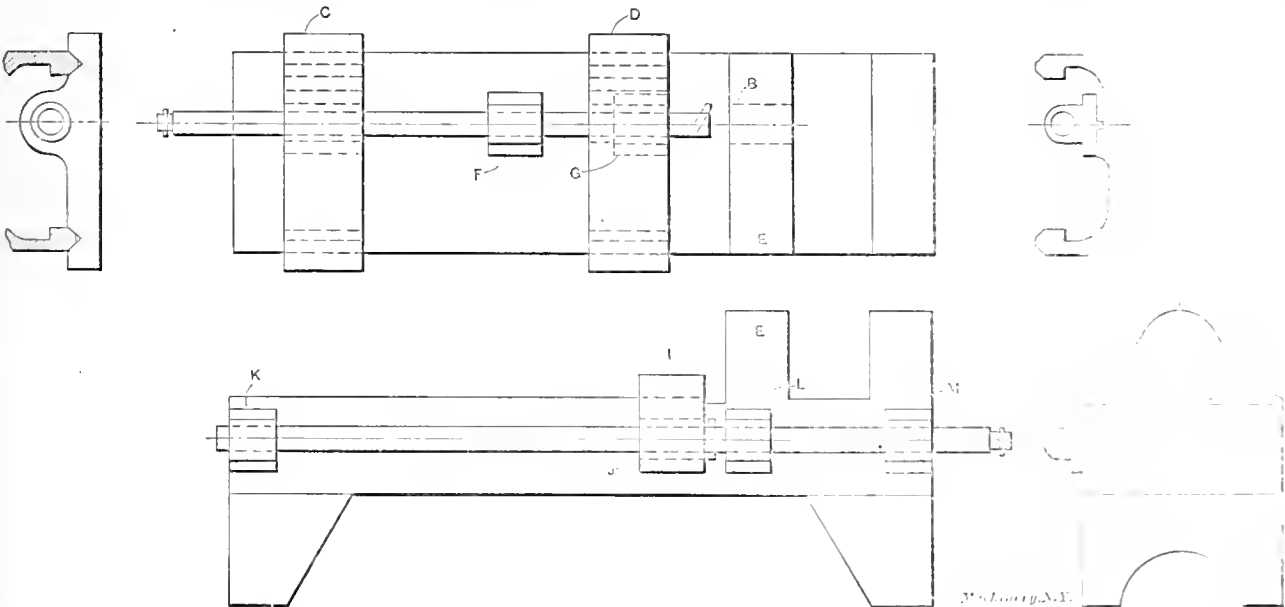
Examples of Boring where Parts of the Machine being built are used as Guiding Means.
